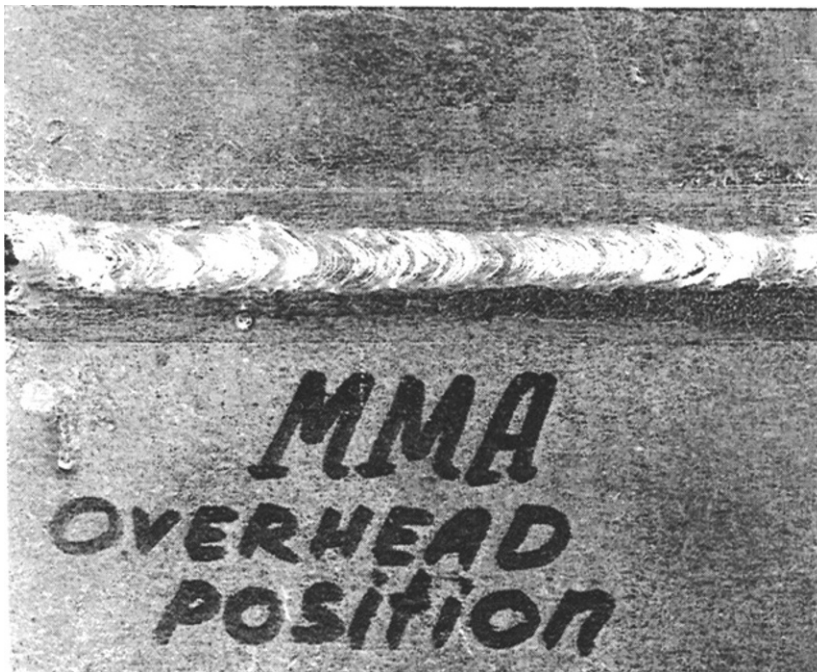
Root weld appearance. The weld has been performed in overhead position with electrode EPS-AN1
